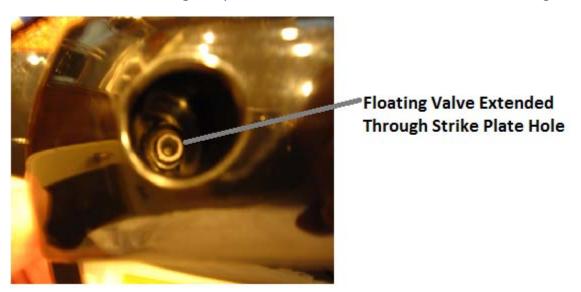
Floating Valve Extended Through Strike Plate Hole
